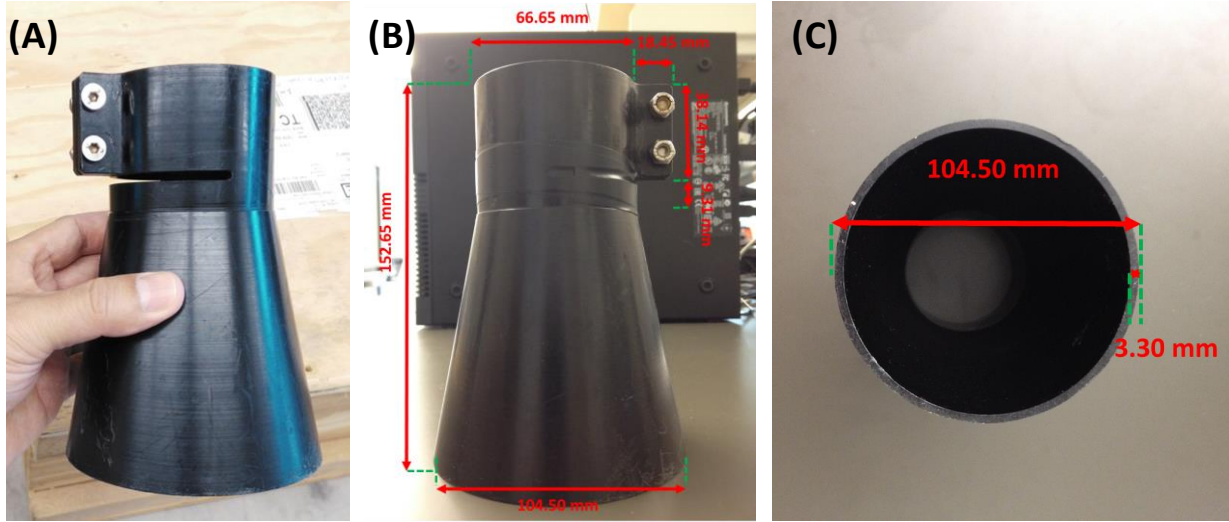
Dimensions of a cone-shaped prototype skylight-blocking apparatus.
